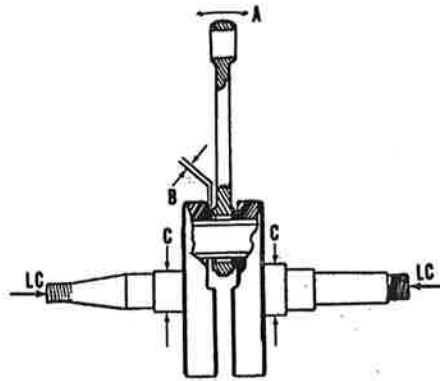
Crankshaft should be supported between lathe centers (LC) when making runout checks.
